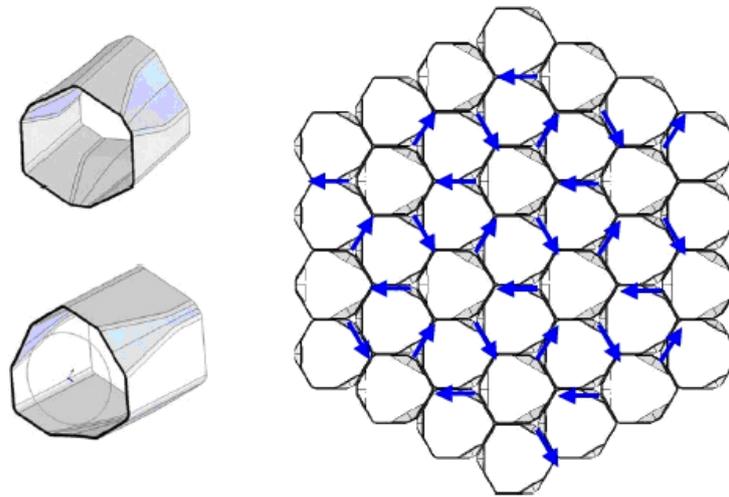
Spacer cells and part of coolant mixing spacer of ‘cyclone’ type designed for AES-2006 (Ref. [122]).
